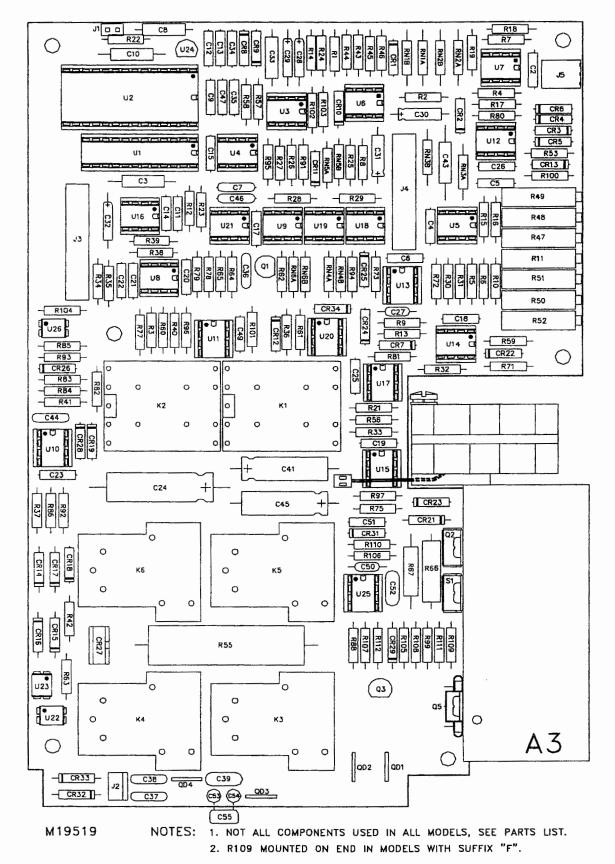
COMPONENT LOCATION OF MST ASSEMBLY A3
